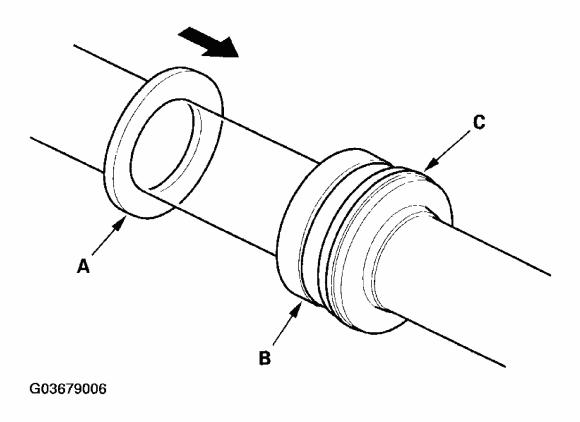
Installing New Backup Ring On Steering Rack Courtesy of AMERICAN HONDA MOTOR CO., INC.
